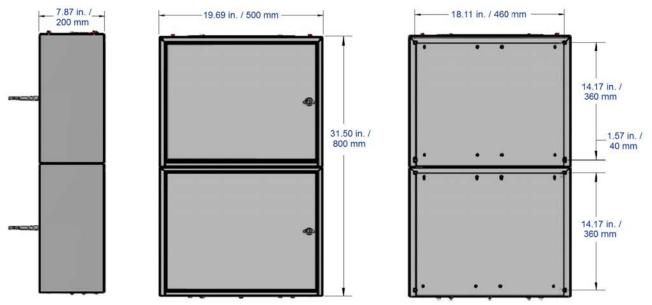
DOUBLE SK Enclosure Overall and Mounting Dimensions
